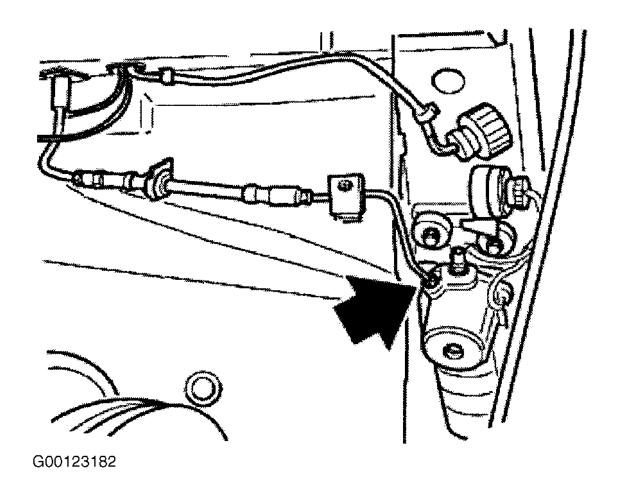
Locating Brake Pipe Courtesy of BMW OF NORTH AMERICA, INC.
